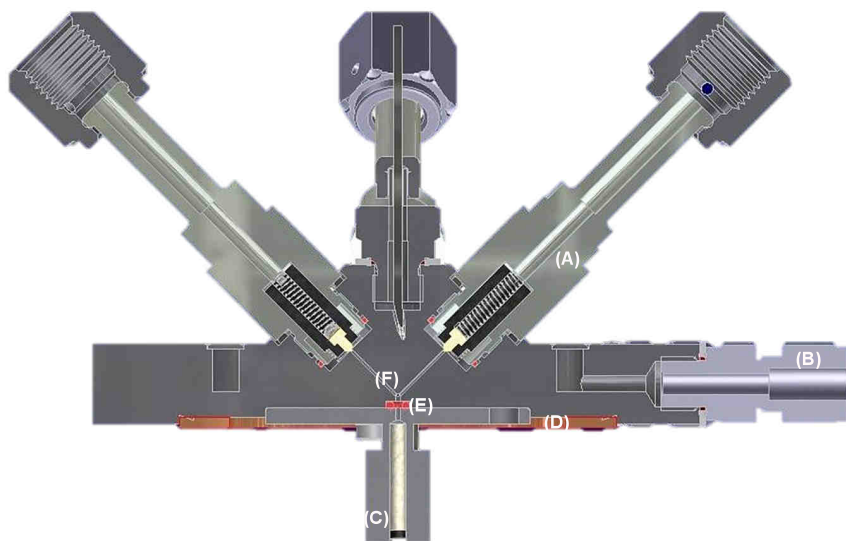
Drawing of the Valve Manifold. (A) Pulse Valve, (B) water cooling, (C) reactor, (D) copper seal, (E) O-ring, and (F) pre-volume.
